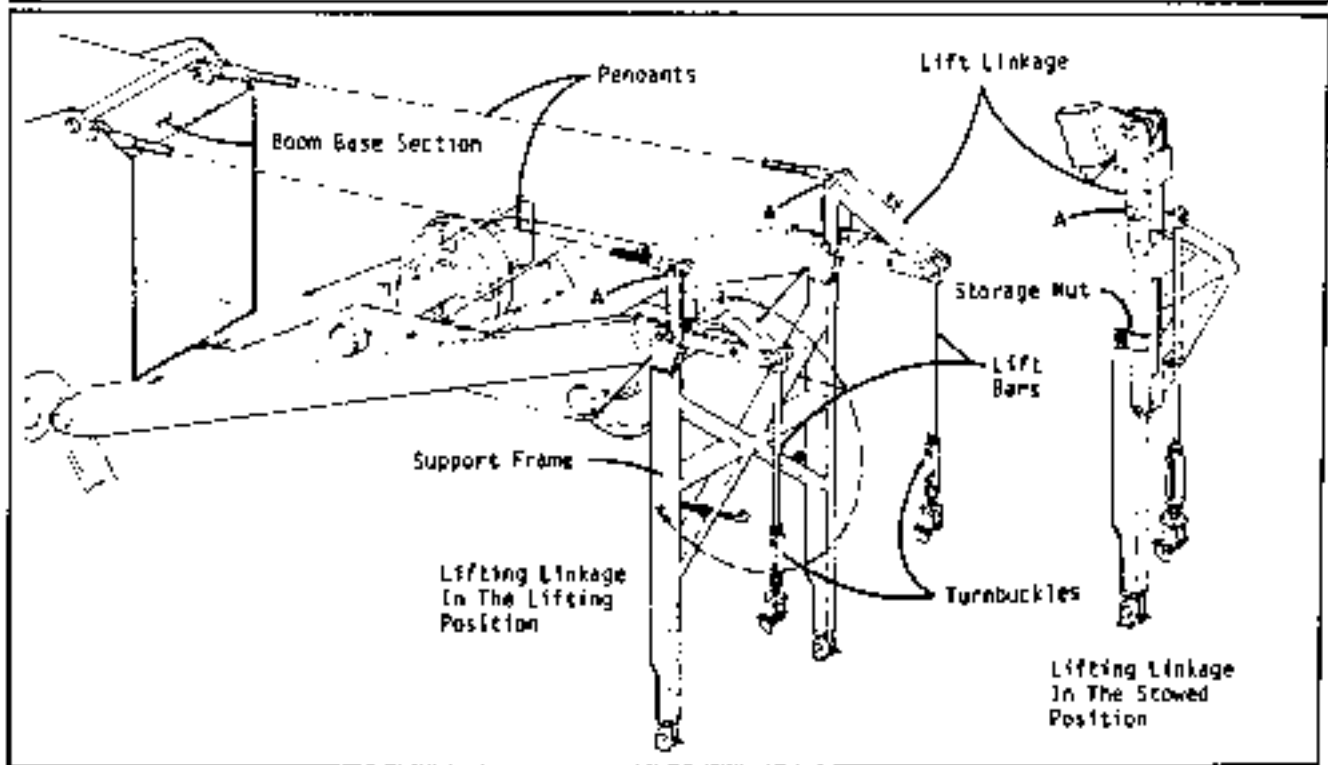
Counterweight Removal Linkage (Fabricated Counterweight)
